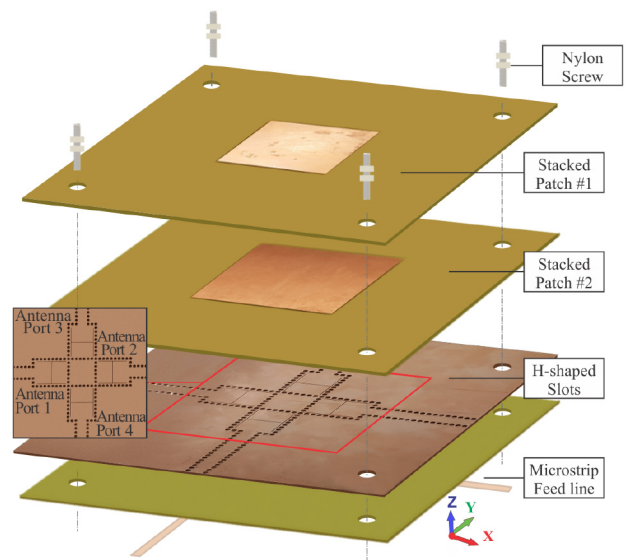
Exploded view of the antenna prototype design (using nylon screws).
